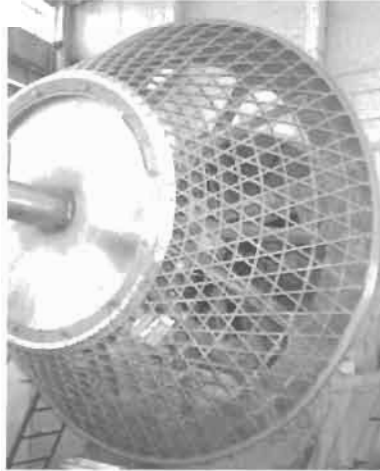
Carbon-epoxy lattice spacecraft fitting in the assemble fixture. Courtesy of CRISM.
